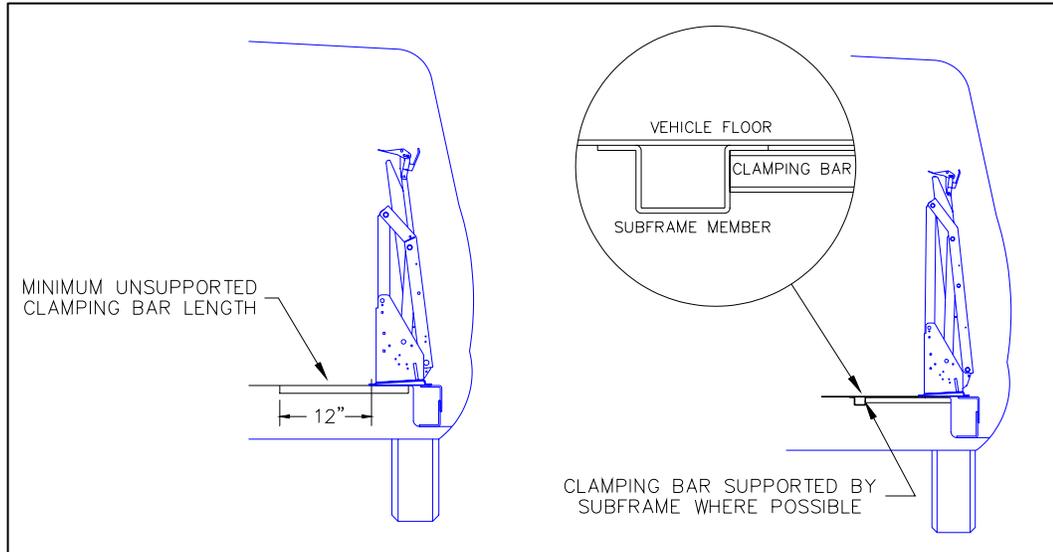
FORD VAN CLAMPING BAR ARRANGEMENT
